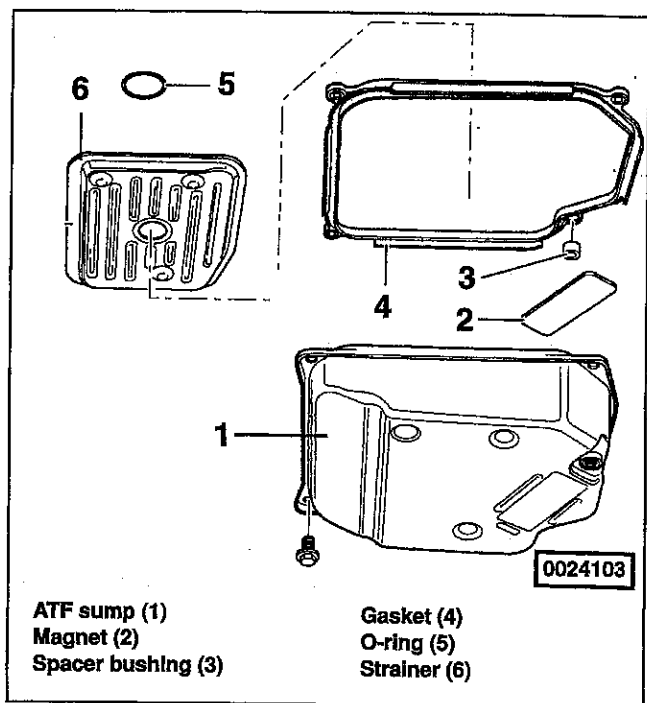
Exploded view of ATF sump on 01M transmission. Be sure to fit spacer bushings into sump gasket.
